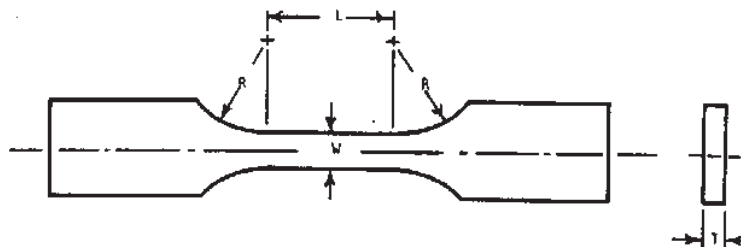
Specimens with Tangentially Blending Fillets Between the Uniform Test Section and the Ends
